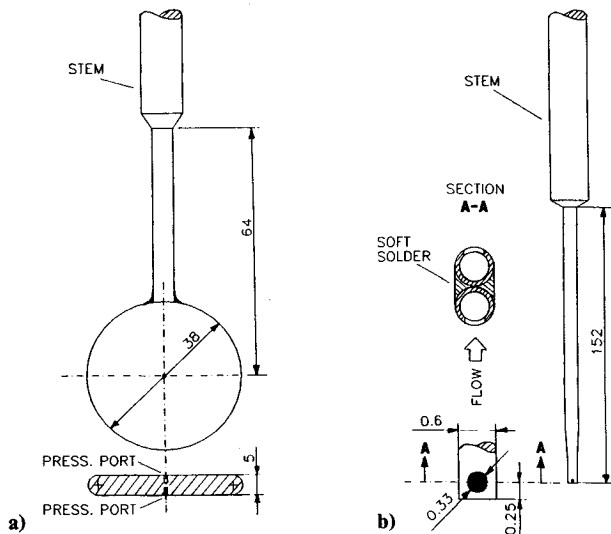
Pressure probes: a) disk probe and b) double pitot tube, mm.
